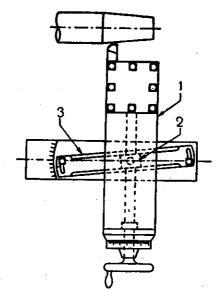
Taper turning attachment 1. Cross-slide. 2. Guide block, 3. Guide bar
